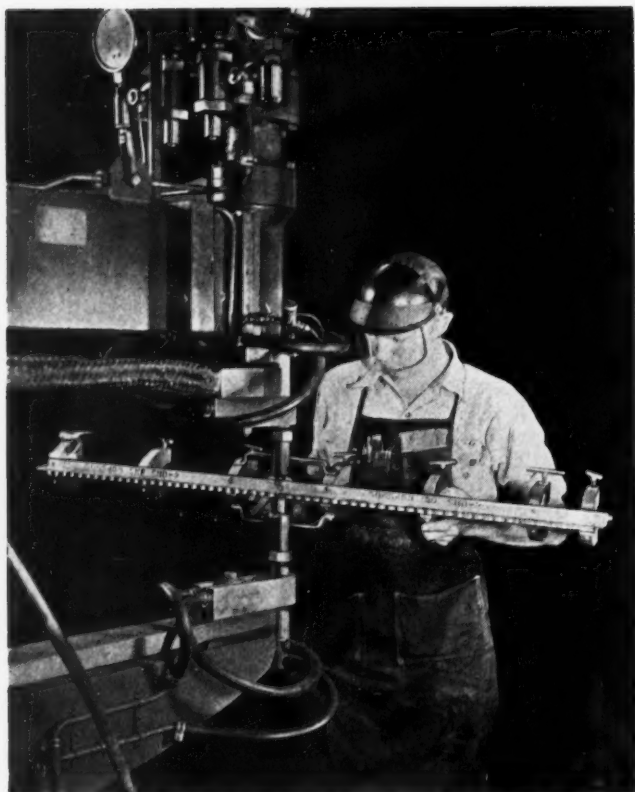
Jig that Provides for the Accurate Location of Spot-welds along the Edges of an Antenna Mast
